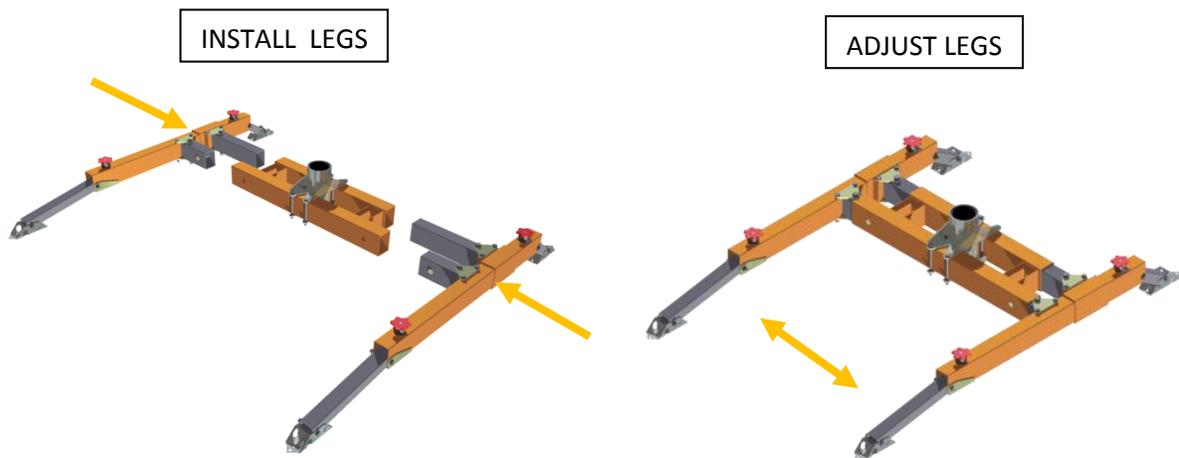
, Assembling & Adjusting Pro-3 Portable Base (Typical)
